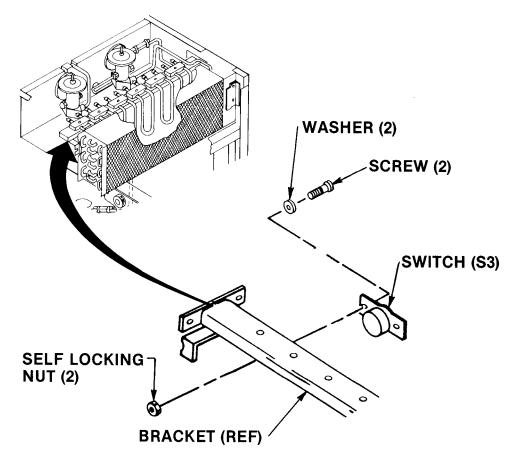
Heater Cutout (Thermostat) Switch (S3)
